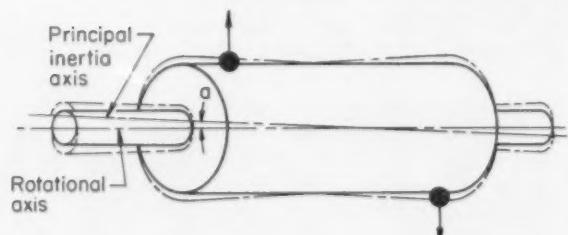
Sketch showing forces causing dynamic unbalance in rotating machine components.
